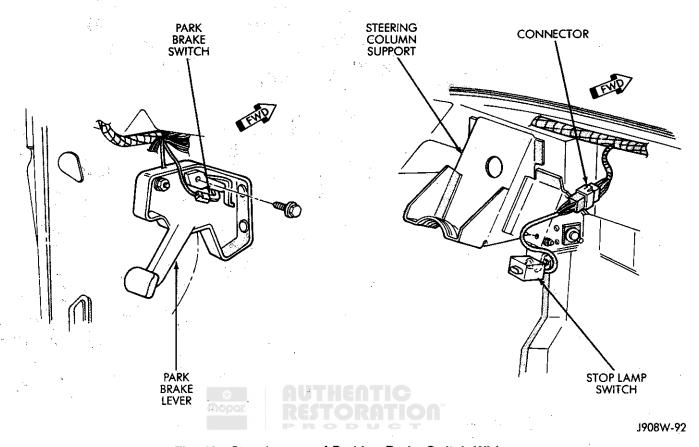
Stop Lamp and Parking Brake Switch Wiring
